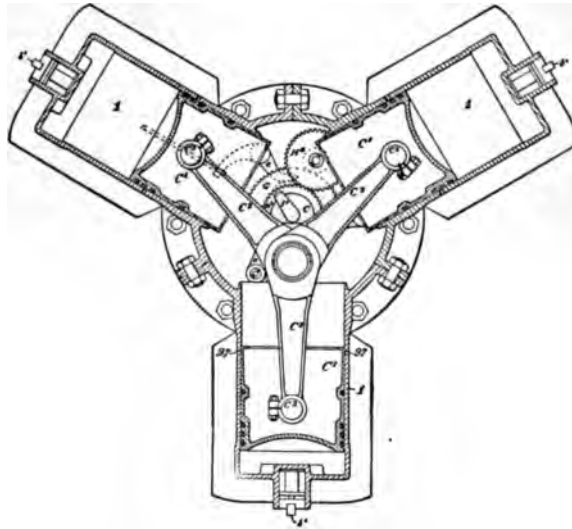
HORIZONTAL SECTION OF ADAMS-FARWELL REVOLVING THREE-CYLINDER MOTOR.
